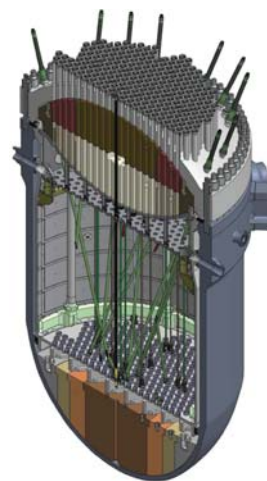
Cross sectional cut view of the RPV (courtesy of [1])
